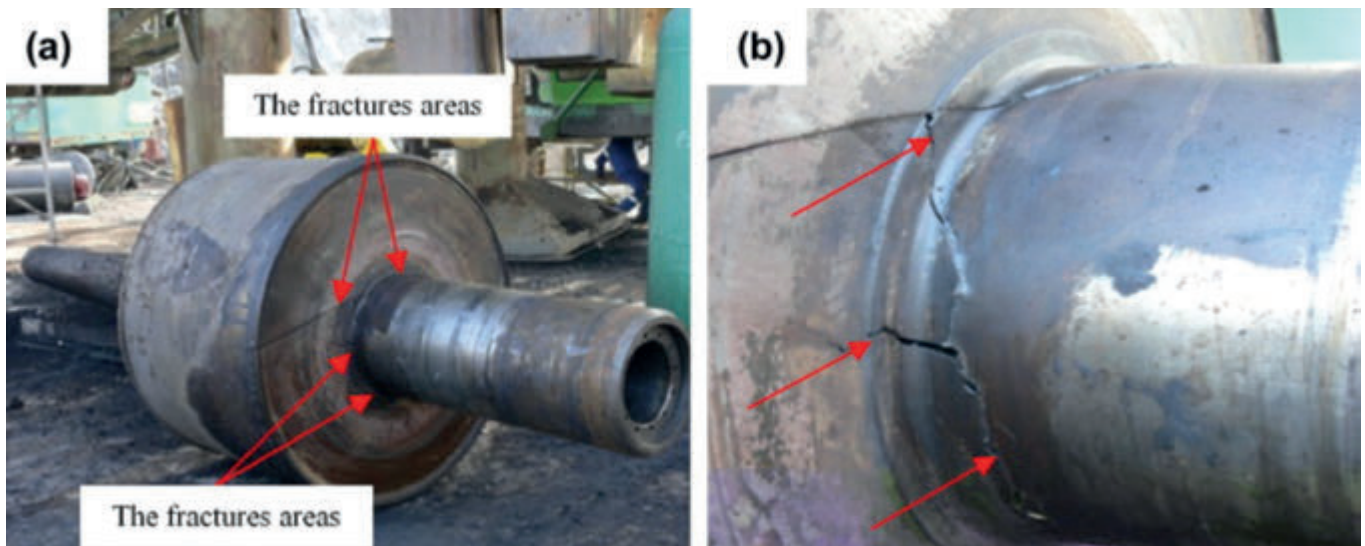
Damaged bucket wheel shaft of BWE KWK 1200 at lignite open pit mine Turów (Poland) : a) overview, b) fracture locations [5]
